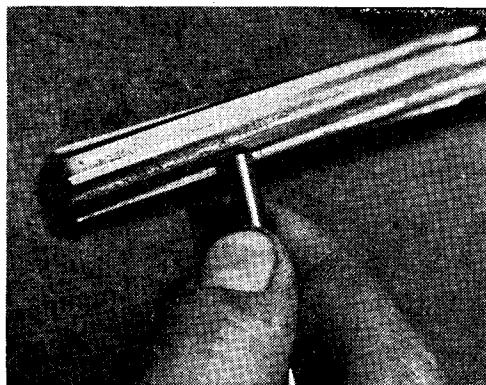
Using a tool bit to burnish cutting edge of reamer
